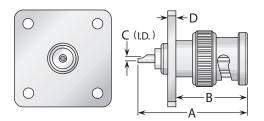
(Solder pot contact, 1" square flange, interchangeable with type N standard flange size)
